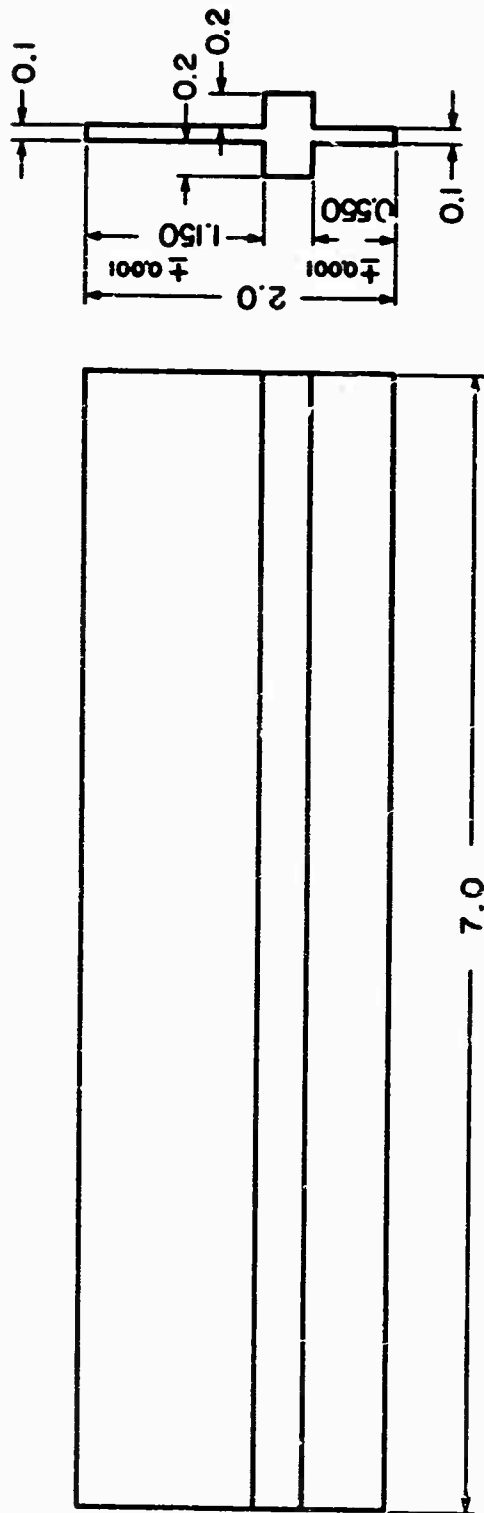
(b). Positior. Setter for Locating Specimen in Plate Holder
